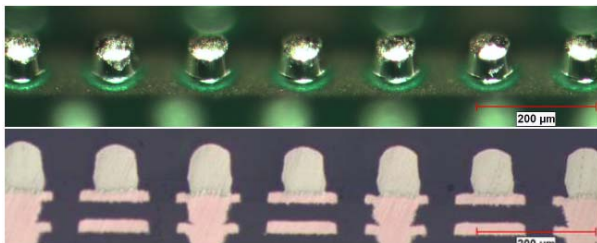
Side and cross-sectional views of IMS bumps on ENIG Ni/Au pads [41].
